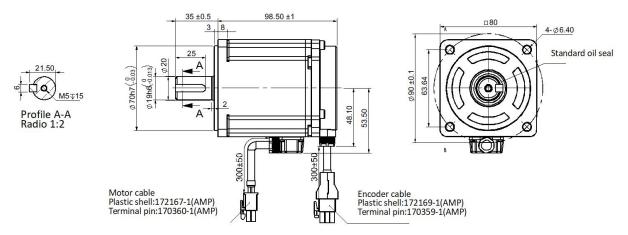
Installation dimension drawing of WD series 80 flange servo motor
